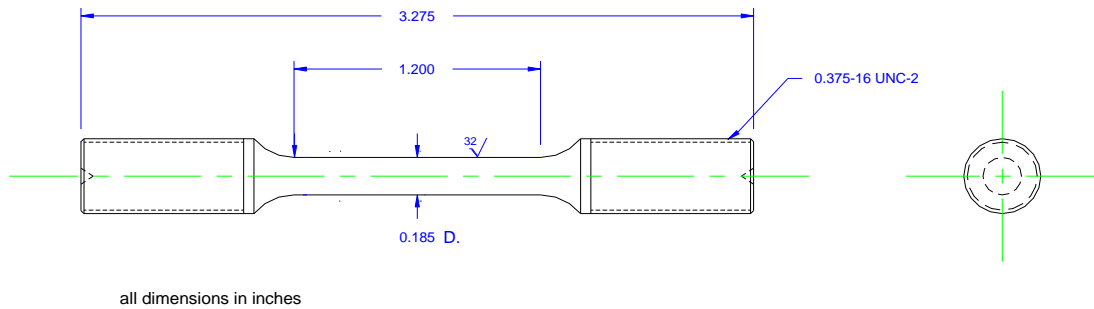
Geometry of stress corrosion cracking (SCC) test specimen.
